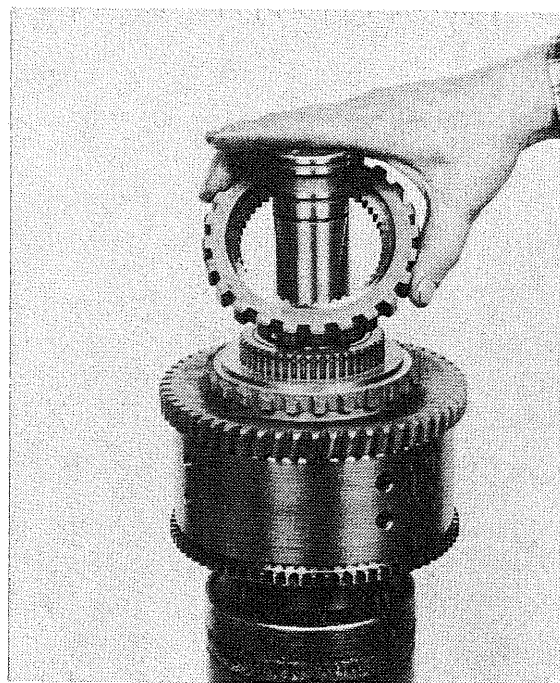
Assembly of the PFR Clutch (1 of 5)
